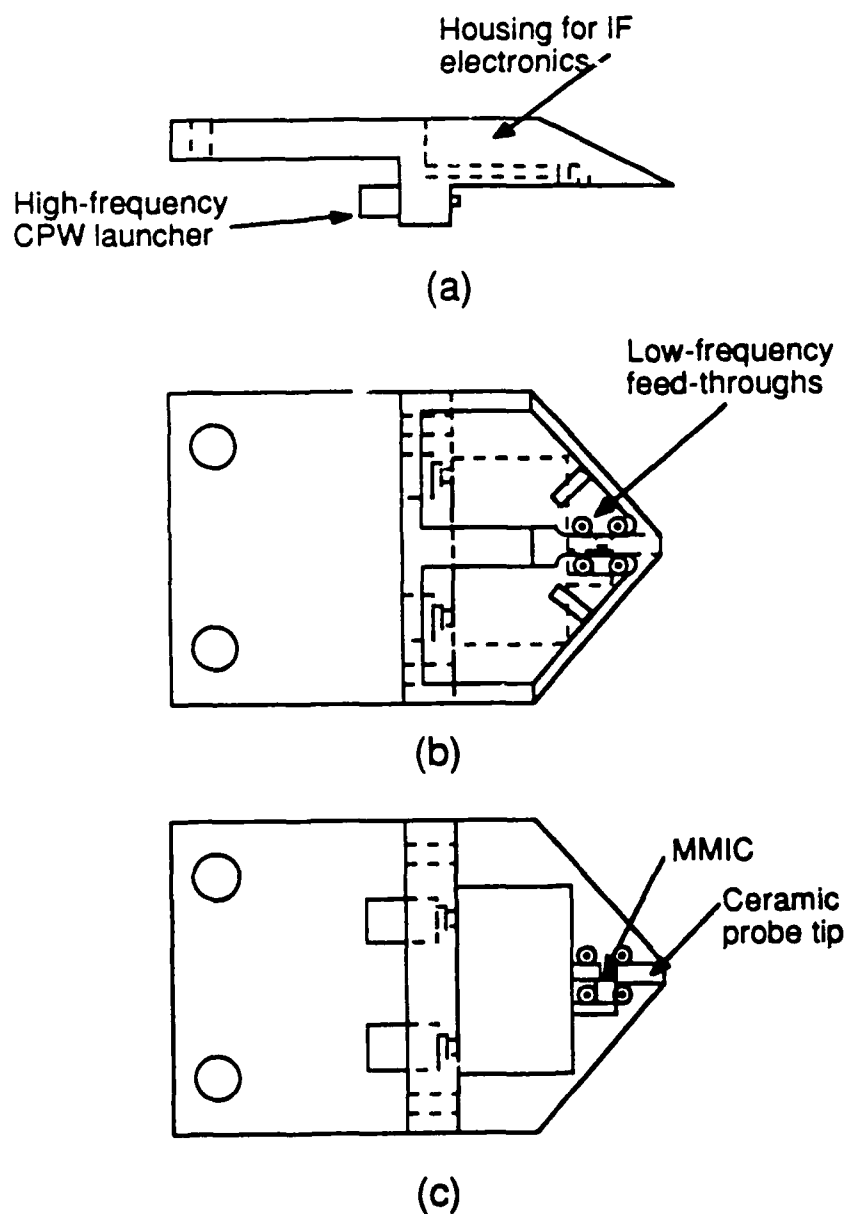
On-wafer probing with GaAs MMICs. A prototype active-probe directional sampler is shown in side view (a), top view (b), and bottom view (c). A ceramic probe tip can be used to 100 GHz, but may be abandoned to reach 300 GHz.
